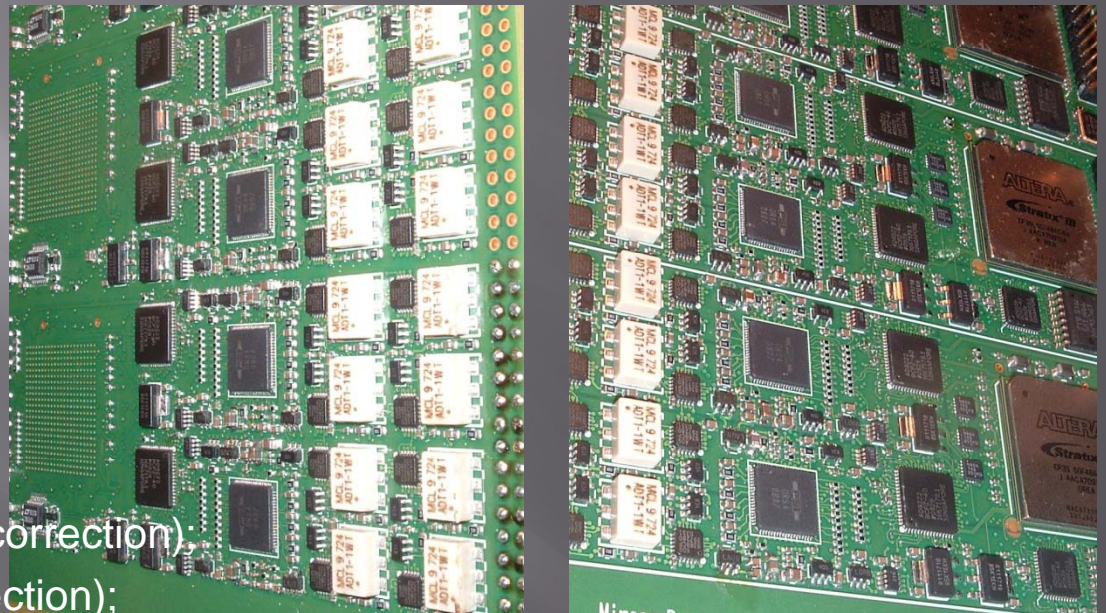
Prototype ADC Module, Top and Bottom sides. The PCB was designed with all components from one front-end block being placed on the same side of the board, resulting in an almost identical top and bottom component placement.
